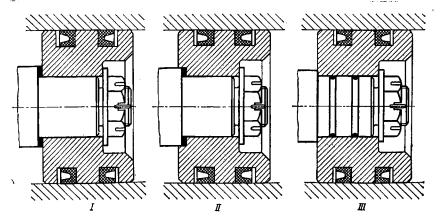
Sealing cylindrical mating surfaces (piston-to-rod joint)
